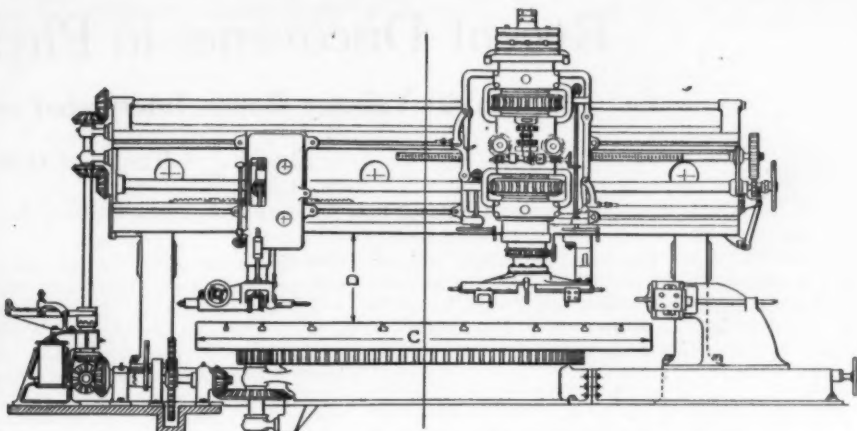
Elevation of the hole cutting machine shown in Fig. 6.
